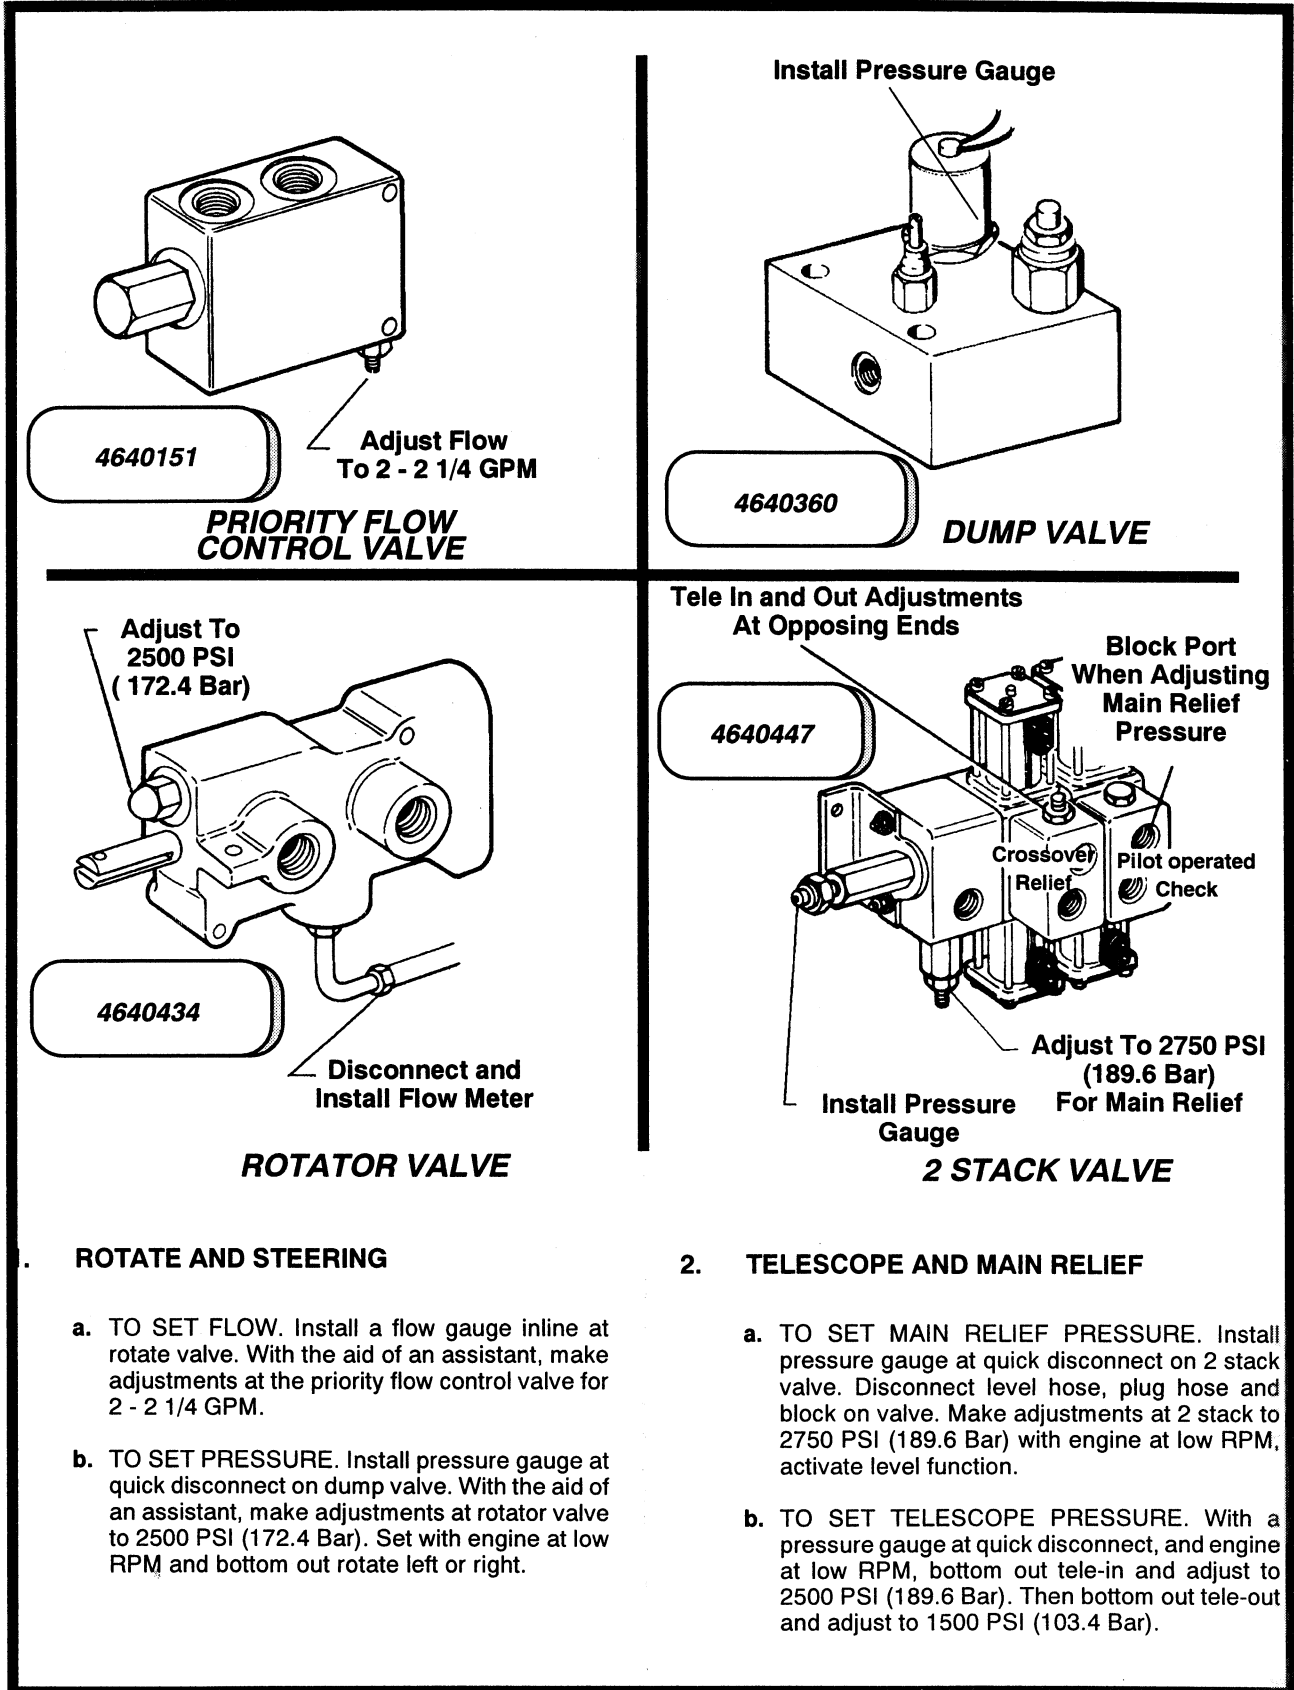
Solenoid Valve Pressure Settings (Machines Built Prior To May 1992 With Steering Wheel).
